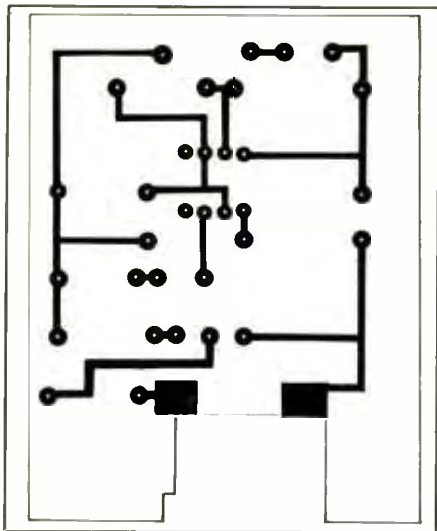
Actual-size etching-and-drilling guide for project's printed-circuit board.
